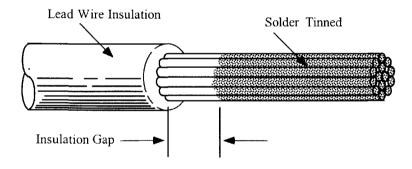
Solder Tinned, Insulated Lead Wire.
